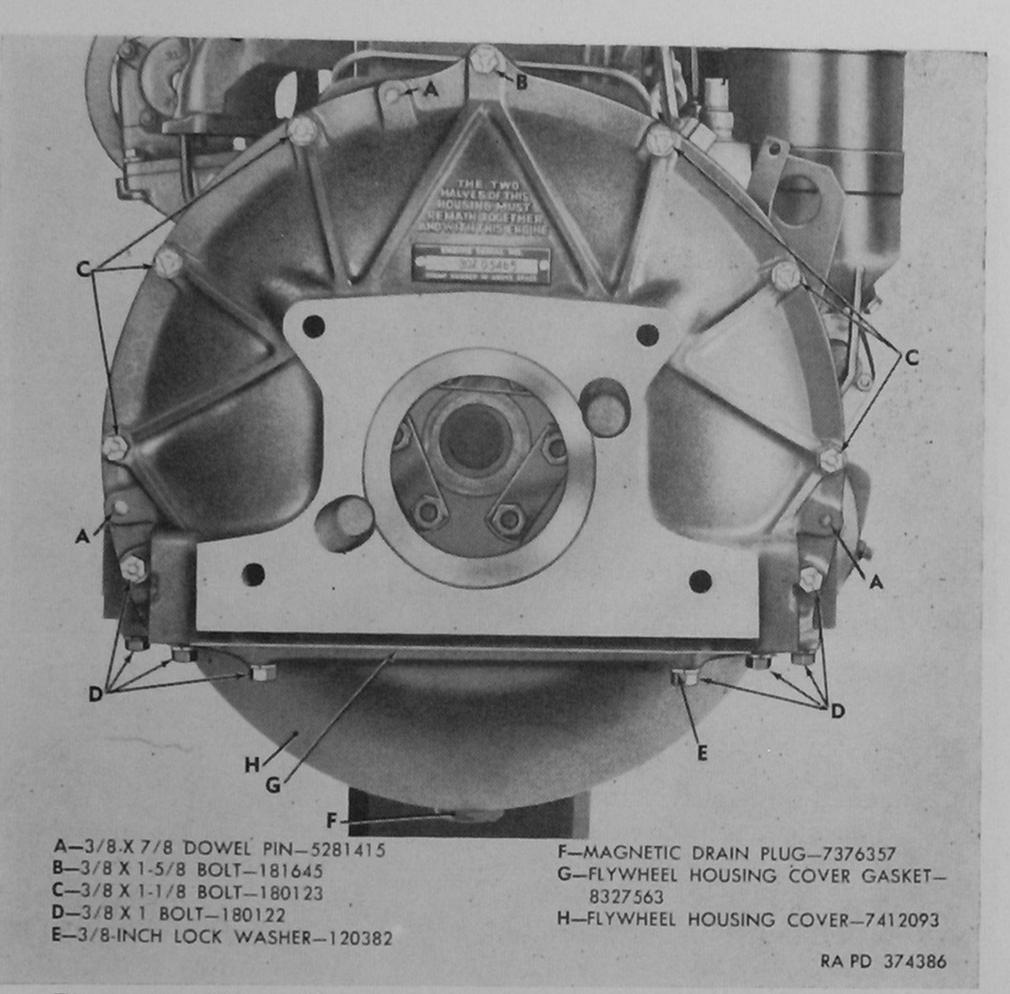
Flywheel housing rear half installed—engine assemblies 7411599 and 8329440.
